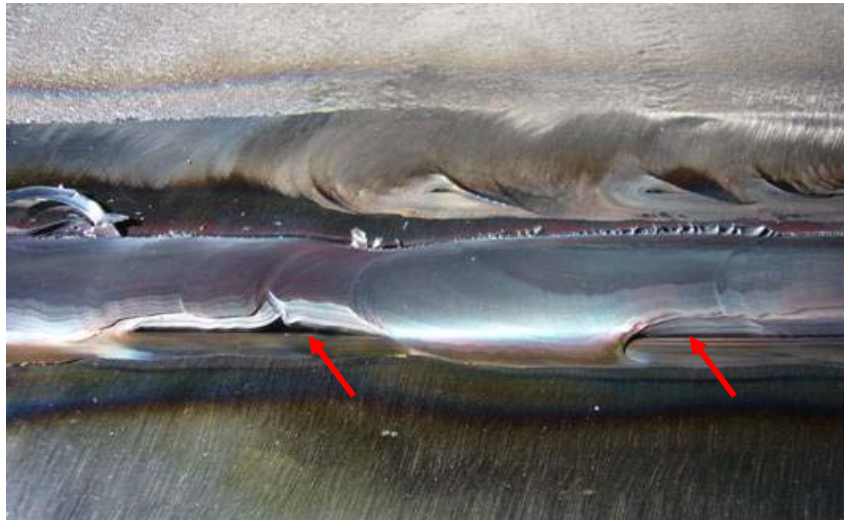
Attempts at defect free weld runs by improving surface finish and changing FSW parameters. Advancing side defect remained but weld flash eliminated. From [13]
